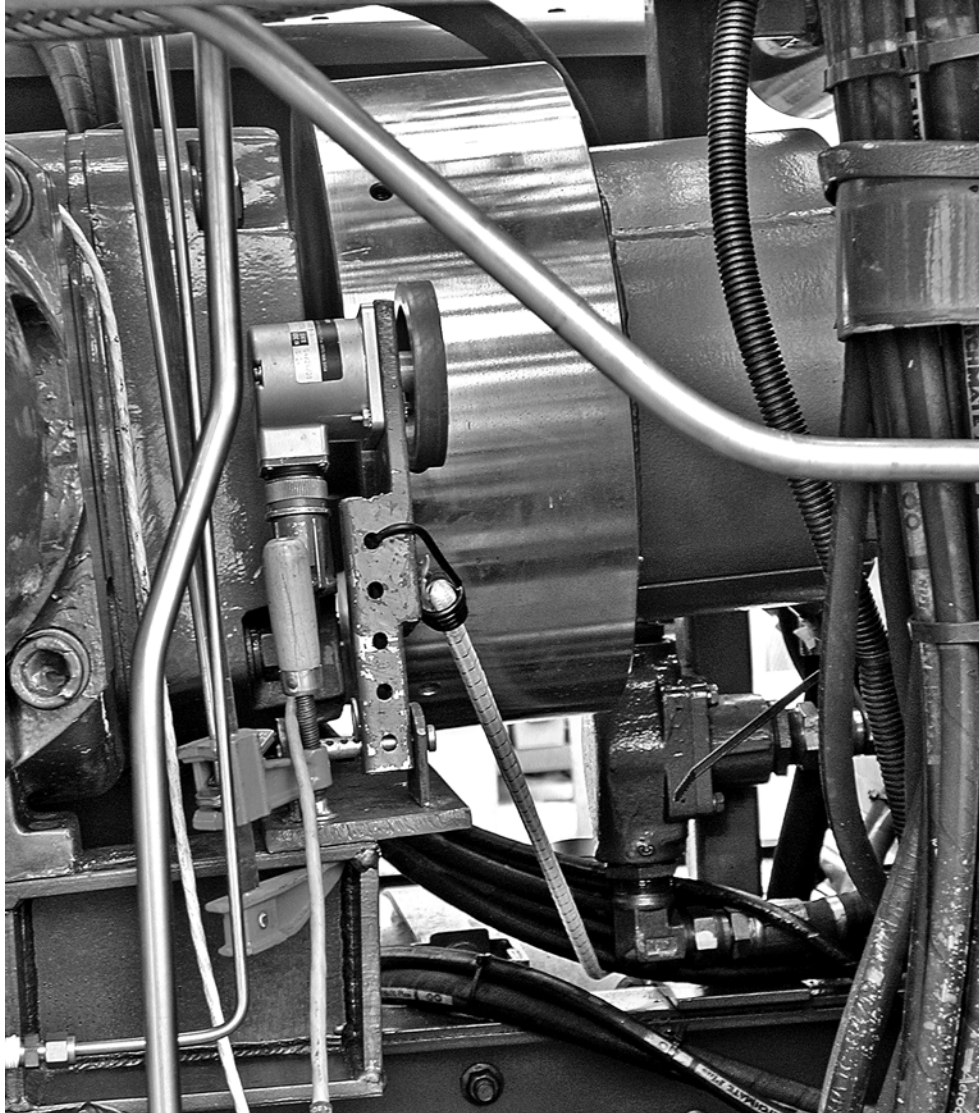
Encoder Mounting Using a Hinged Joint and Bungee Cord
